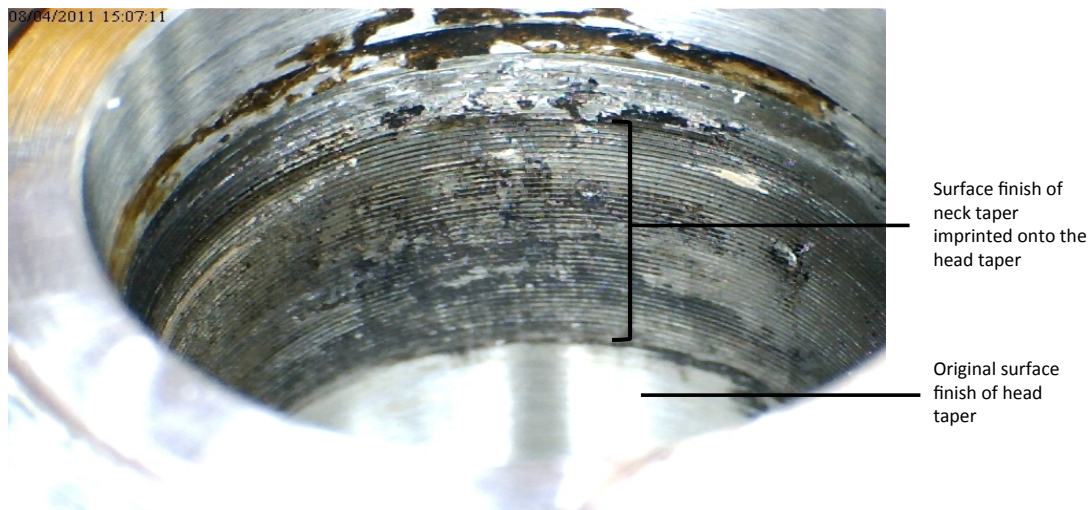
Photograph of a retrieval head taper showing the original surface markings of the head taper and the imprinted surface markings of the neck taper onto the head taper.
